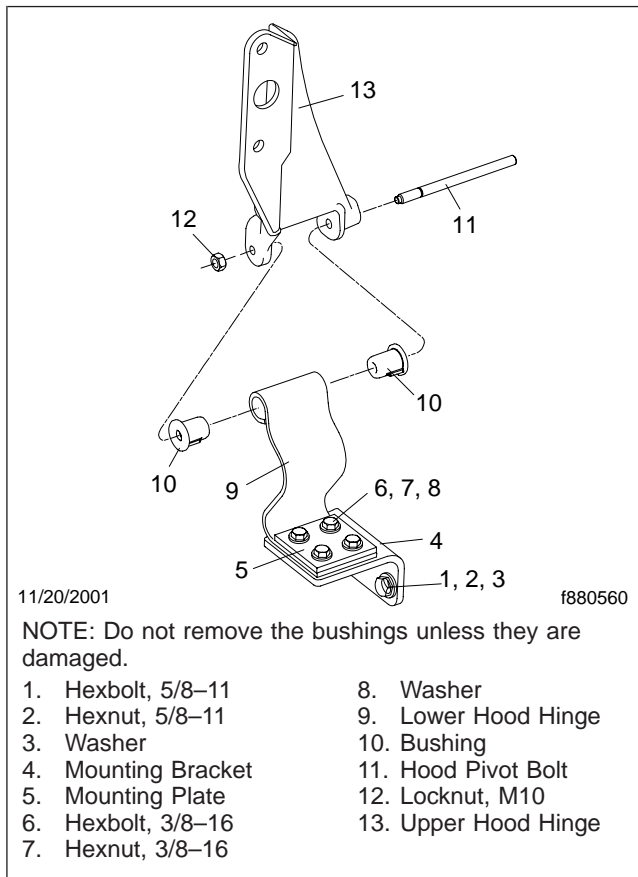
, Hood Pivot Bolt Installation (vehicles with an engine manufactured through 2006)
